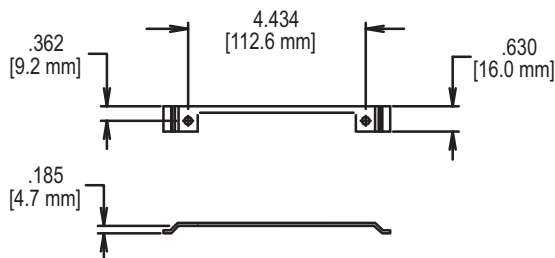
MAXIM COVER 41211.XX /HANDLE 11329.XX (LH) (SHOWN)
